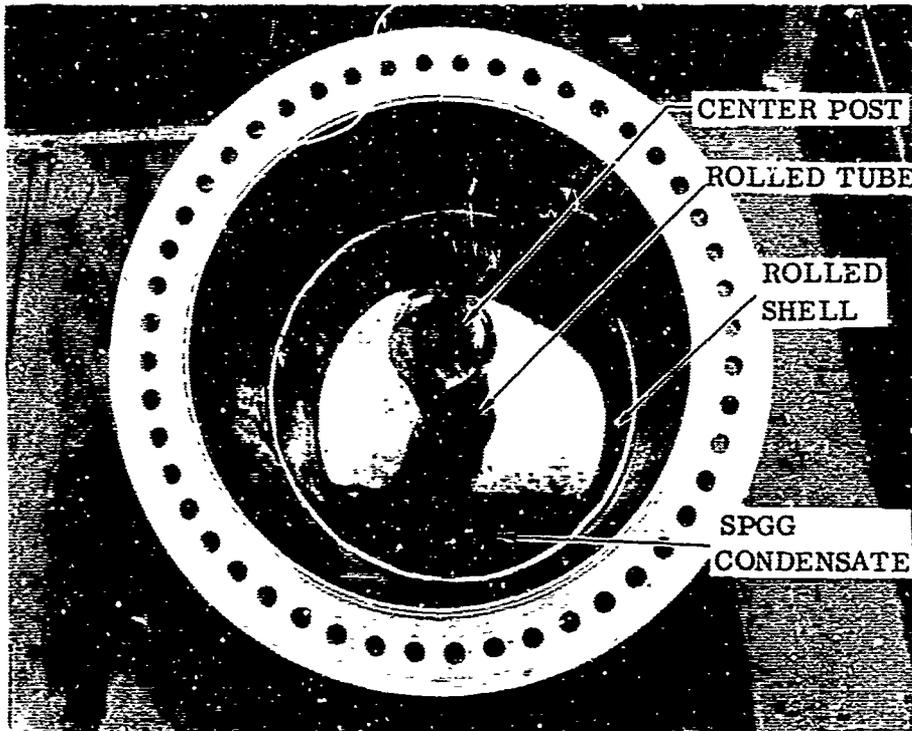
Rolling Diaphragm Assembly After Test 9 (Gas Bulkhead End)
